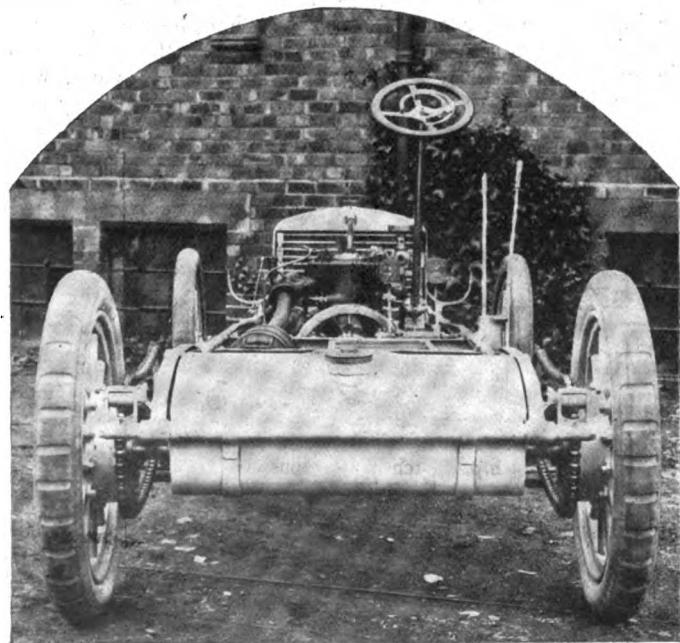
Rear View of Chassis of Austin 25-30-h.p. Car.
